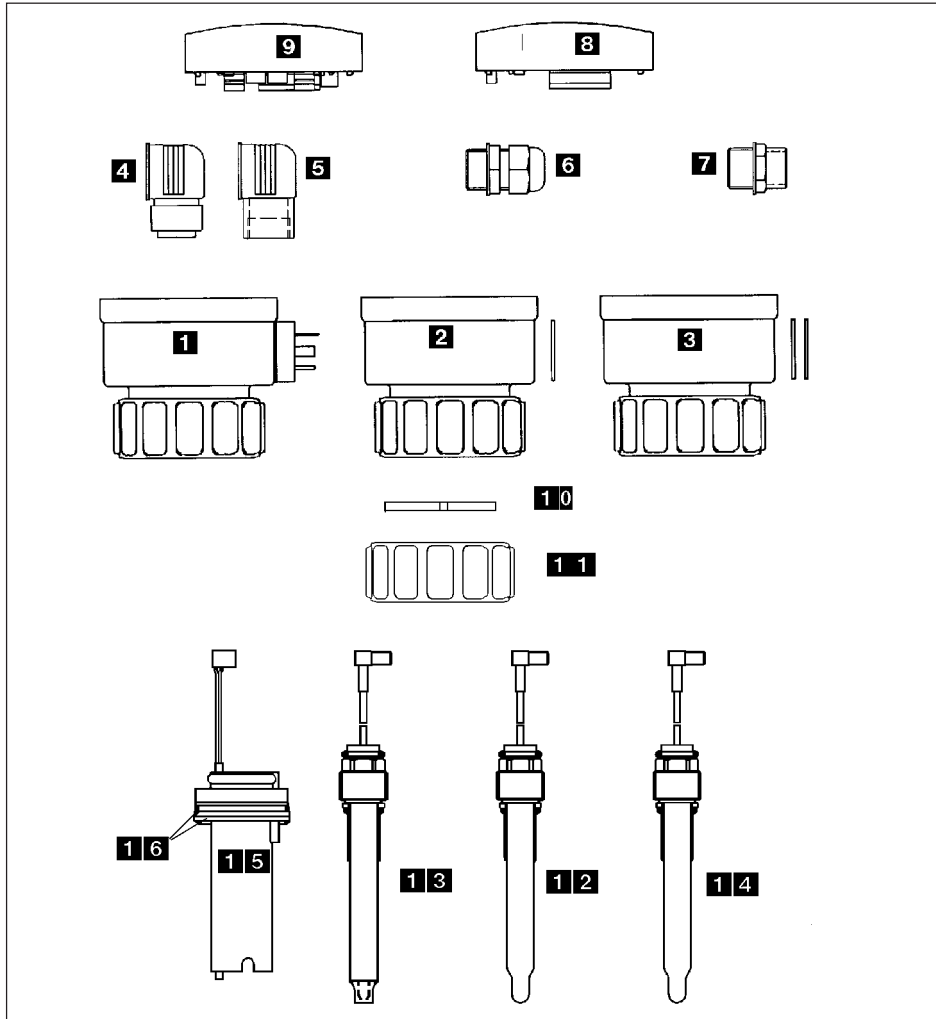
Spare parts explosion drawing type 8205 panel version
